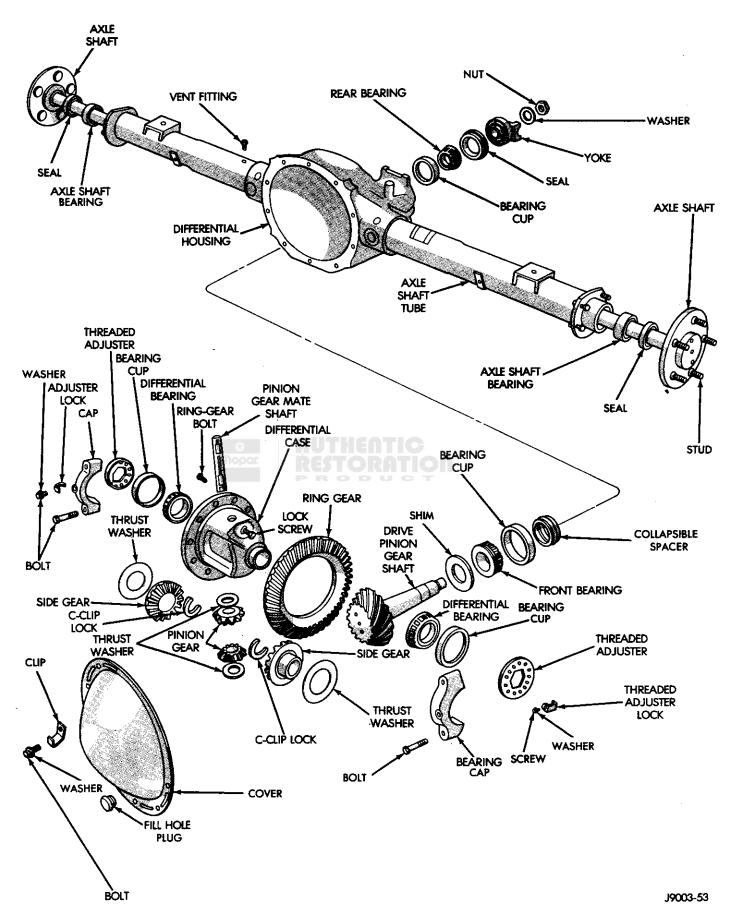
Rear Axle With 9 1/4-Inch Ring Gear
